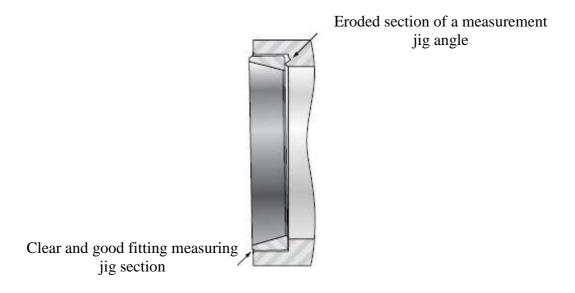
Example of eroded and good condition section of a measurement jig.
